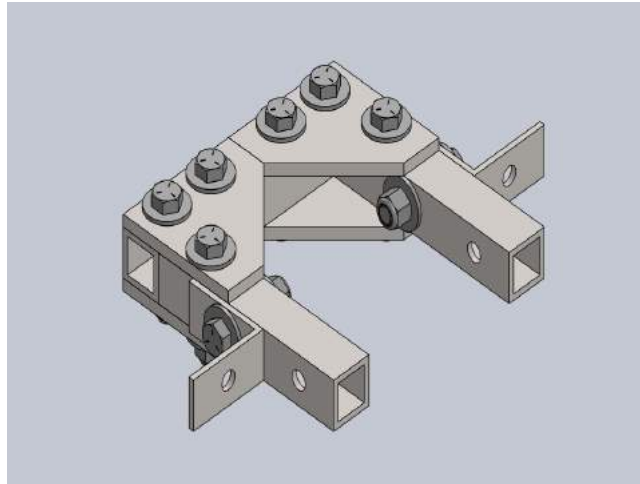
Shoulder Subassembly in the Torso Assembly
